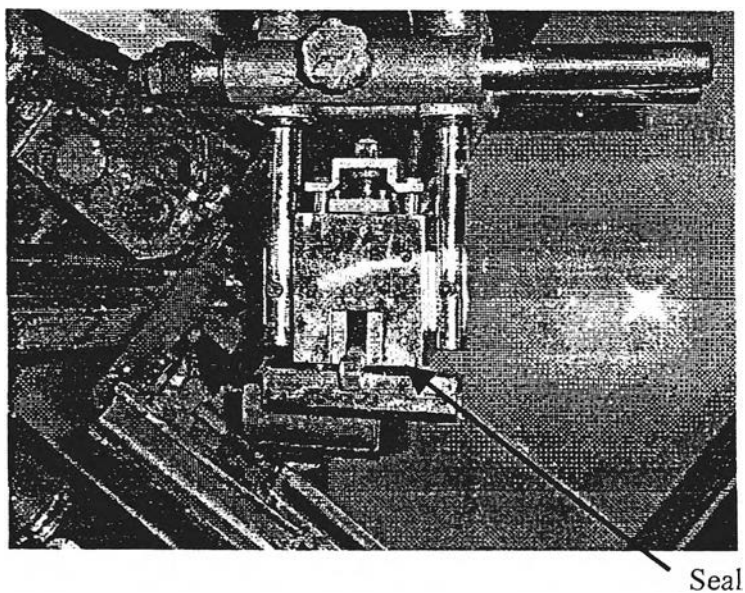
Picture of Squeegee system in silk screen printing machine
